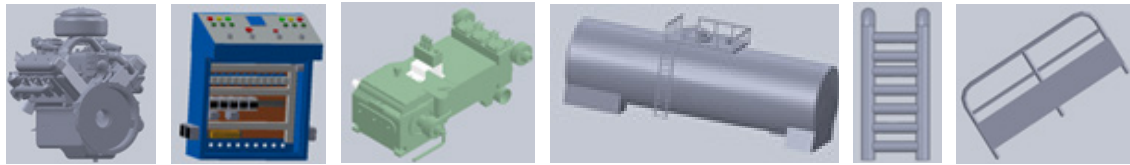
Designs of parts for the pumping unit in SolidWorks (motor, control unit, pump, grate, fluid storage tank, ladder) / Figura 13. Diseños en Solid Works de piezas para la unidad de bombeo (motor, control de mandos, bomba, reja, tanque de almacenamiento de fluidos, escalera)
